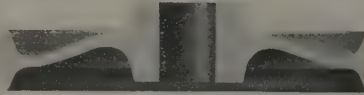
Solid Forged and Rolled Steel Wheel. Carnegie Steel Company.
